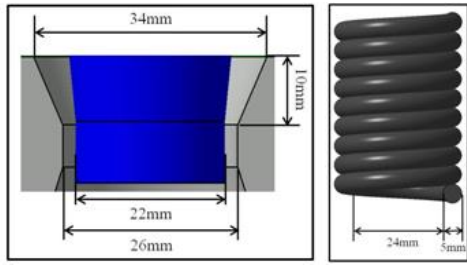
Dimension of conical die and mandrel and spring type wire material for simulation
